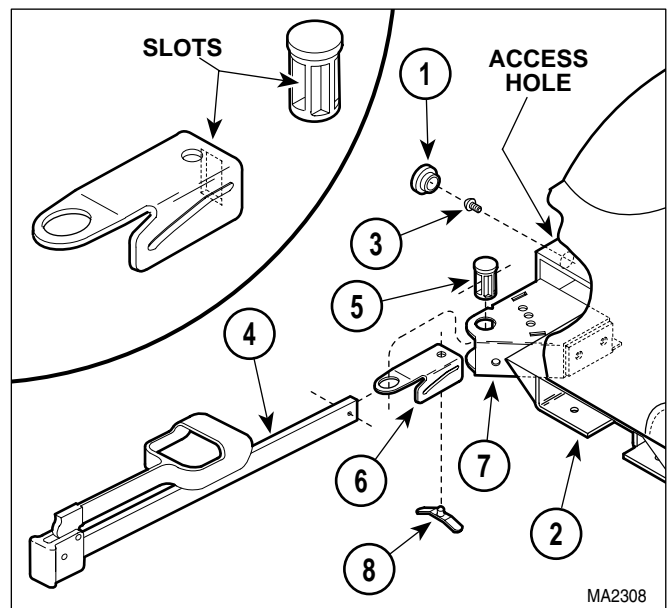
Stirrup Assembly And Components Removal / Installation
